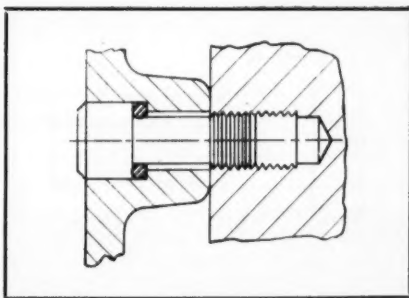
Sketch showing design of latch for use where boss on door must contact mating piece.
